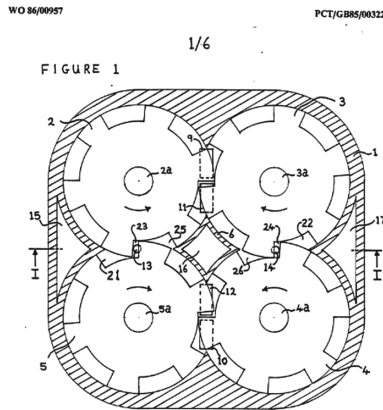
Construction with gears having non-standard tooth profiles [7].
